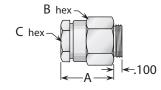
(Clamp type for flexible cable or solder-clamp for semi-rigid cable)
